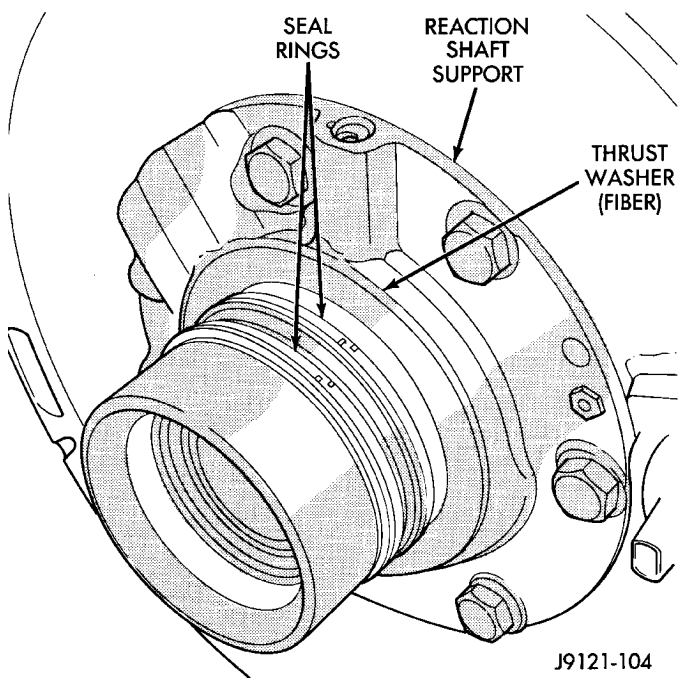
Reaction Shaft Seal Ring And Thrust Washer
